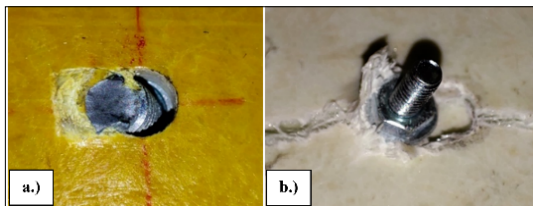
a) Bearing type failure with sheared fastener ($t=6$, M6 bolt)
